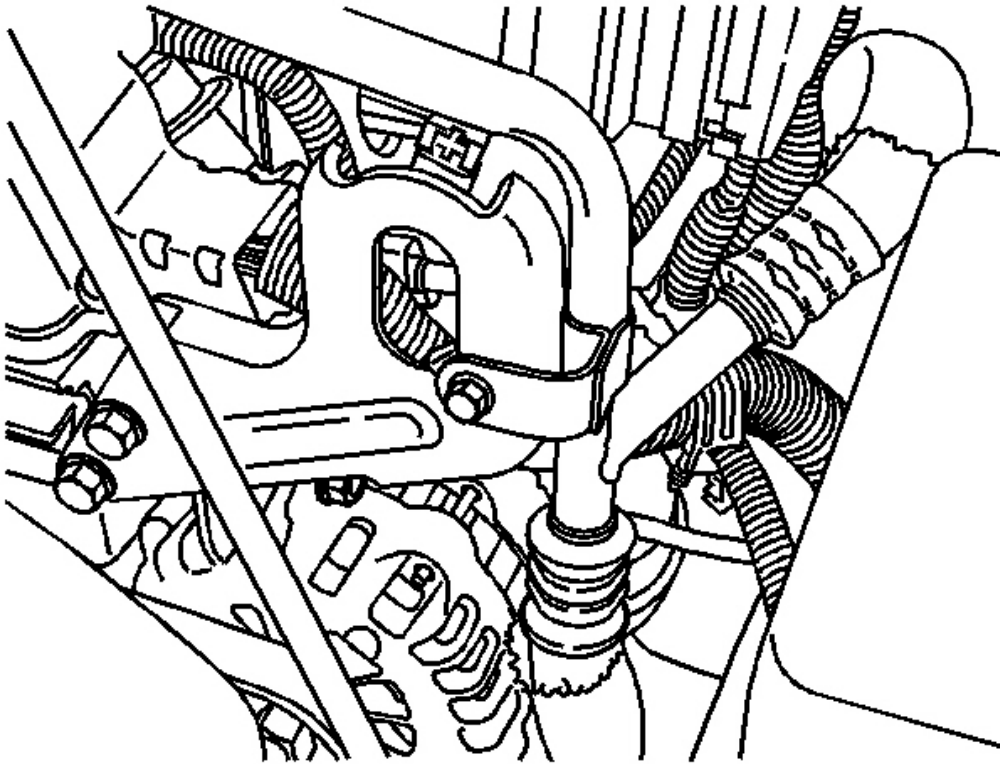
View Of Engine Lift Hook & A/C Bracket Bolt
